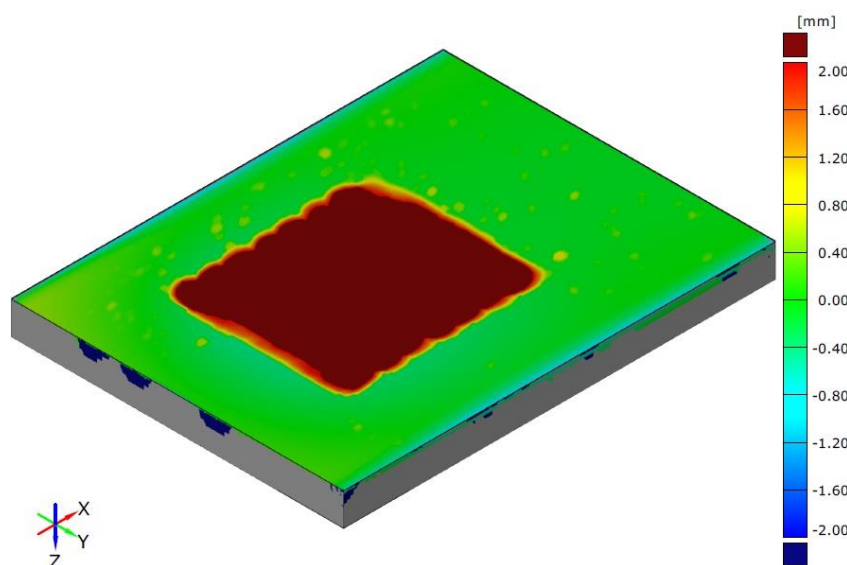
Scanned surface deposited with welding parameters of wire feed rate 4m/min and 19V
